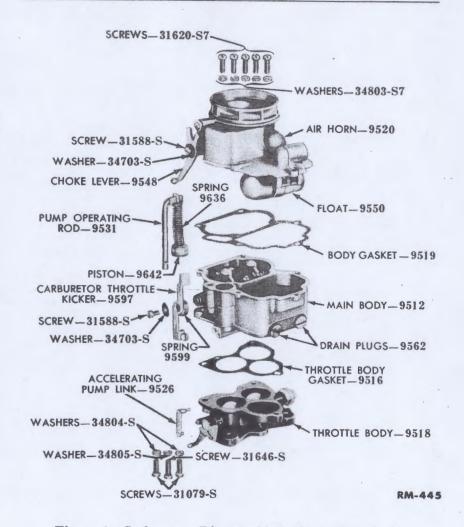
Carburetor, Disassembled (Dual Downdraft)
